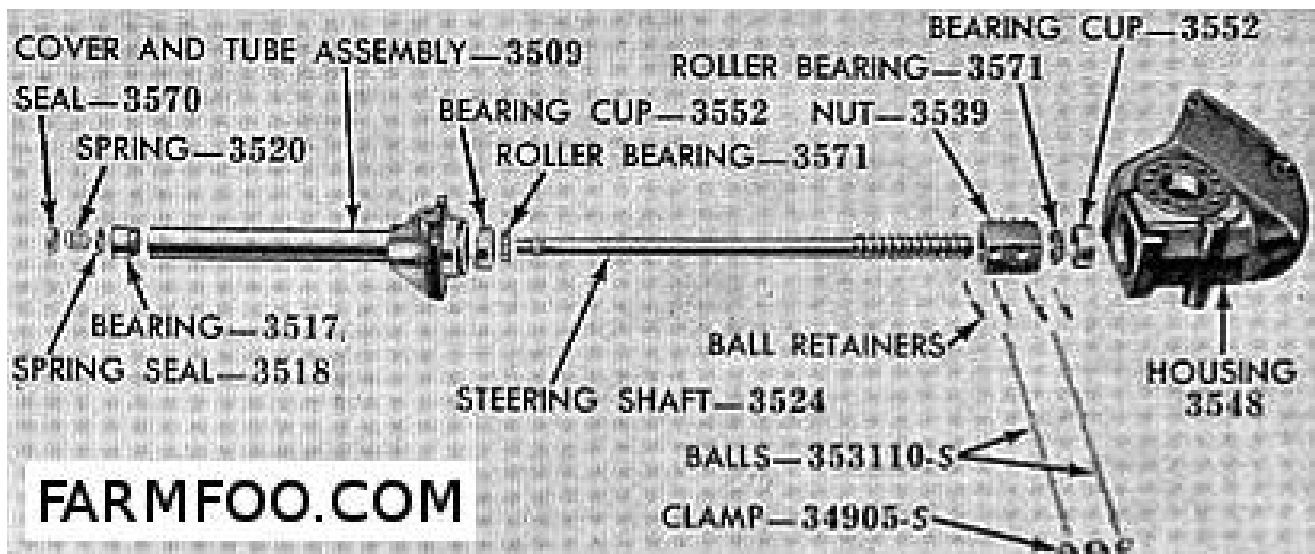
Disassembled worm shaft for steering gear used on 8N prior to tractor serial 216989. Nut (3539) and steering shaft (3524) are not sold separately.
